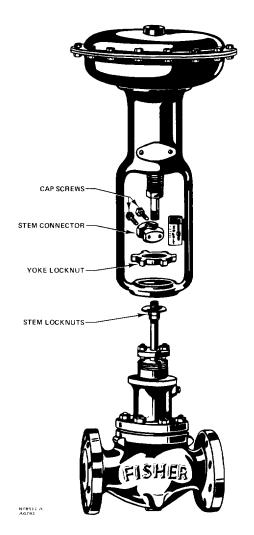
Actuator Mounting Components for Sizes 30 through 70 Actuators
